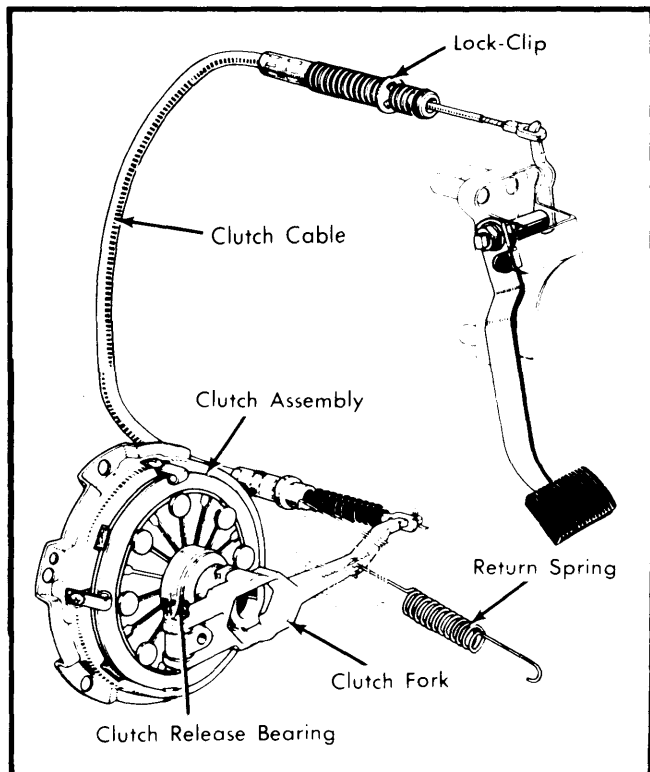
Clutch System Layout. Use Figure for Component Identification
